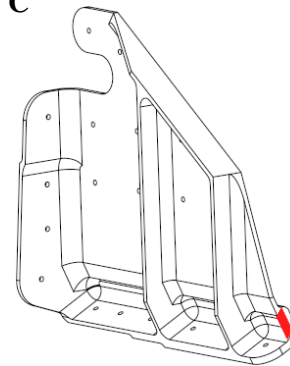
Strains in the flange of the metallic fitting connecting side keel panel to lower bulkhead up to 2P DUL.
